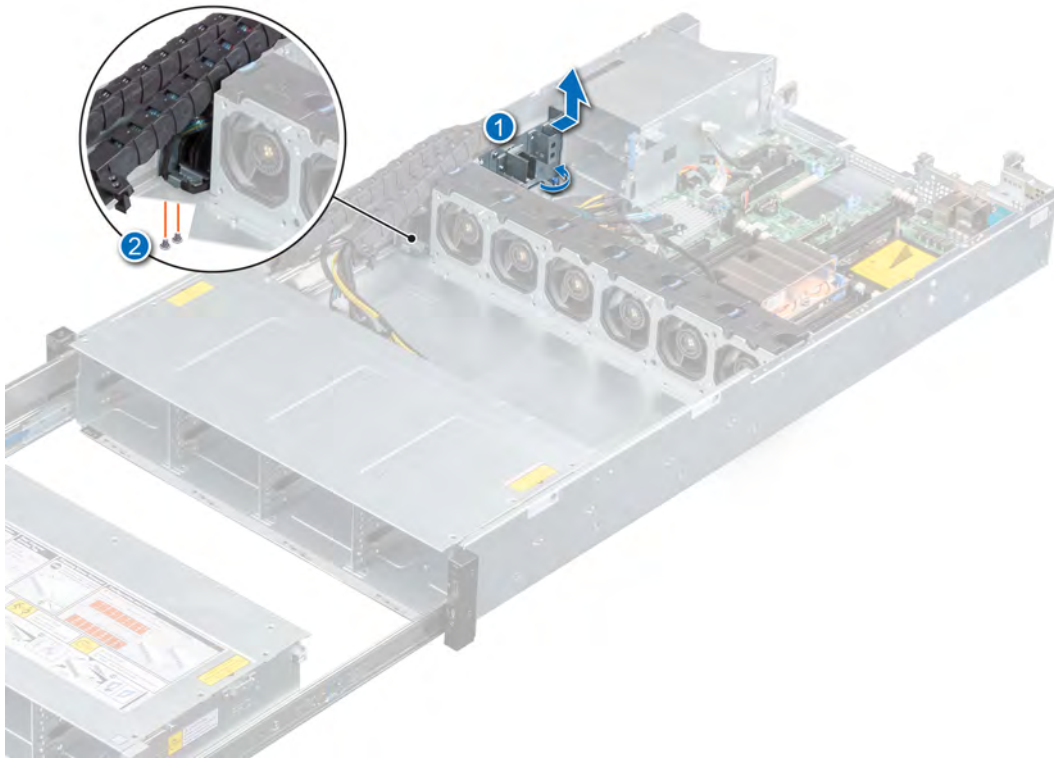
Removing screws for cable chain base bracket and cable chain side cover
